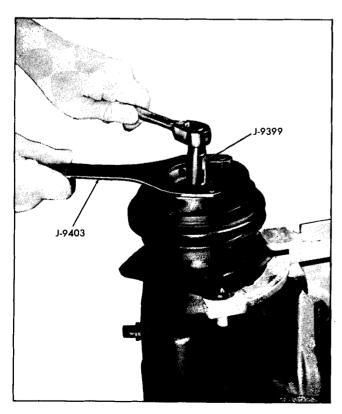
A-61 Removing Hub and Drive Plate Lock Nut
